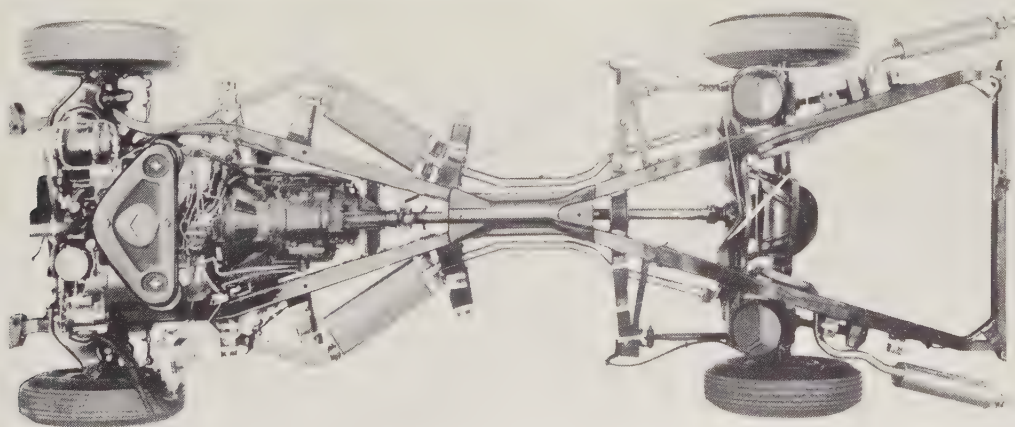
The assembled position of the rear air springs, the two lower control arms, and the single upper control arm is shown in this view of the chassis. The outrigger brackets provide mounting locations for attaching the body to the frame.
